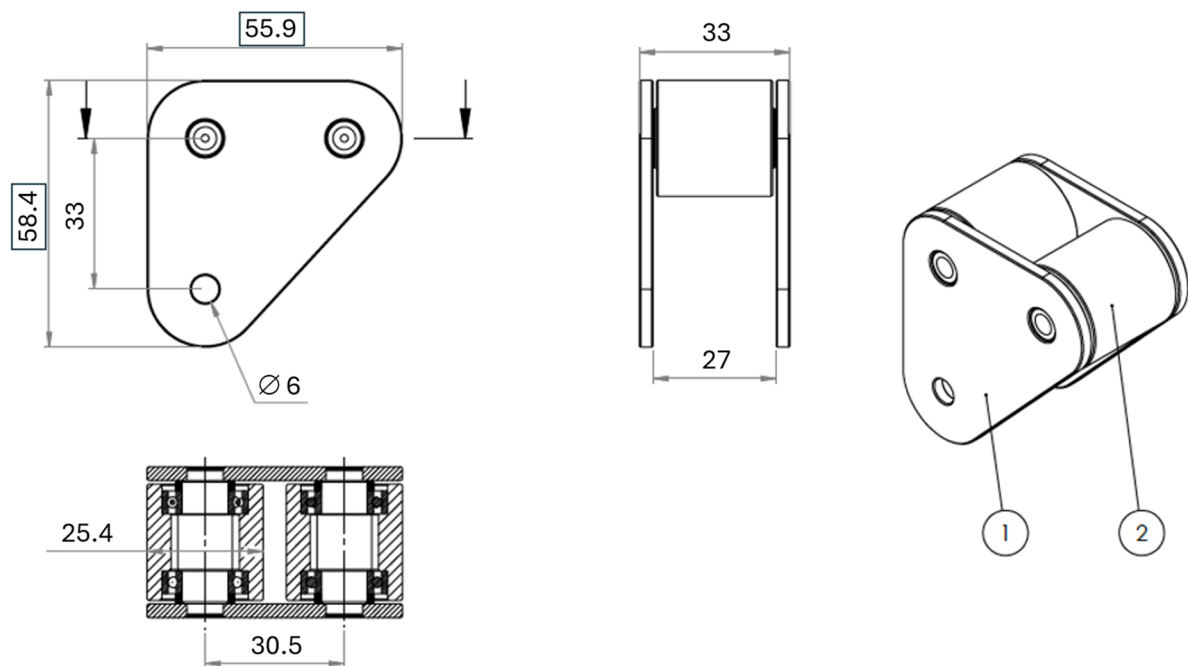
General assembly drawing of the floating roller peel testing apparatus.
